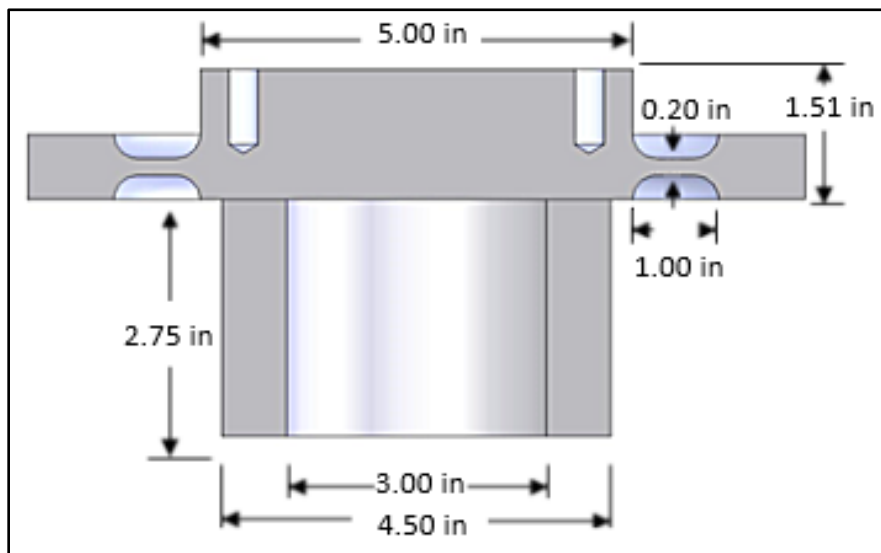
Two-Dimensional Shaker Table Model Dimensions
